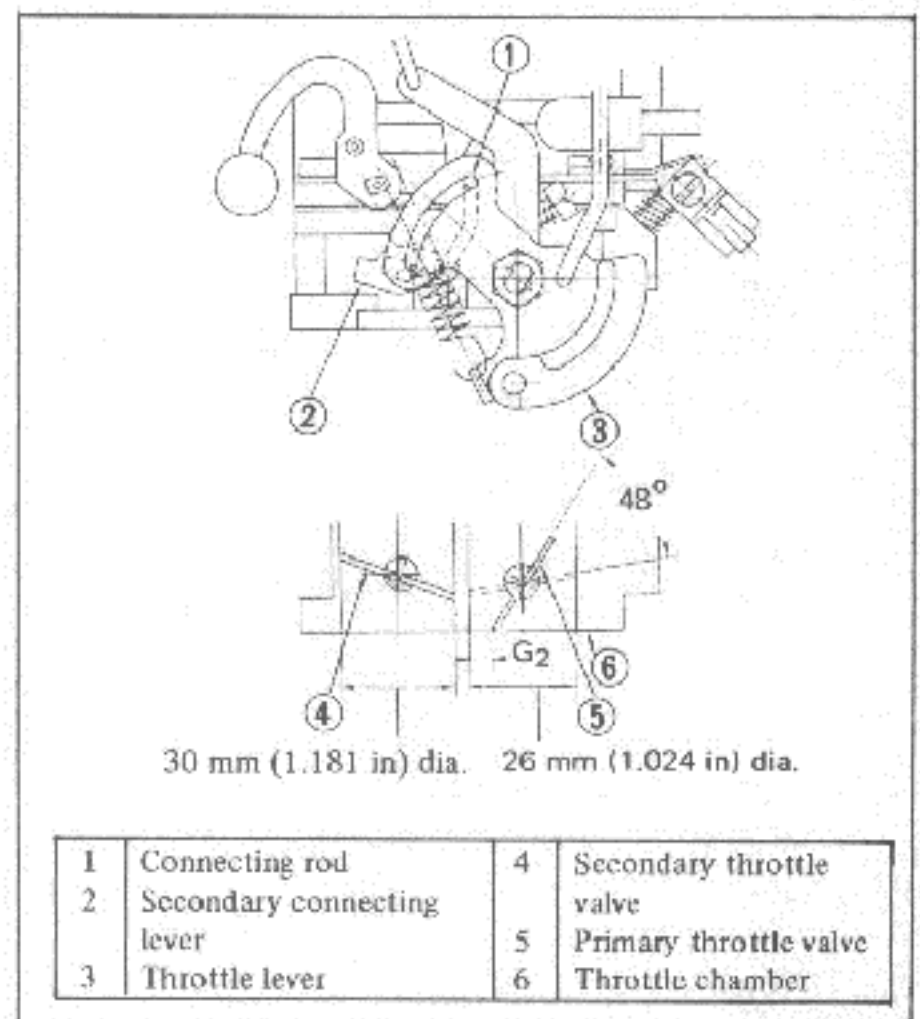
Adjusting interlock opening (primary and secondary throttle valves)
